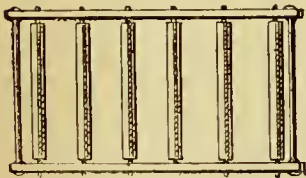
CARRIER ON WHICH IRON PLATE OF PRESS ROLLS.
